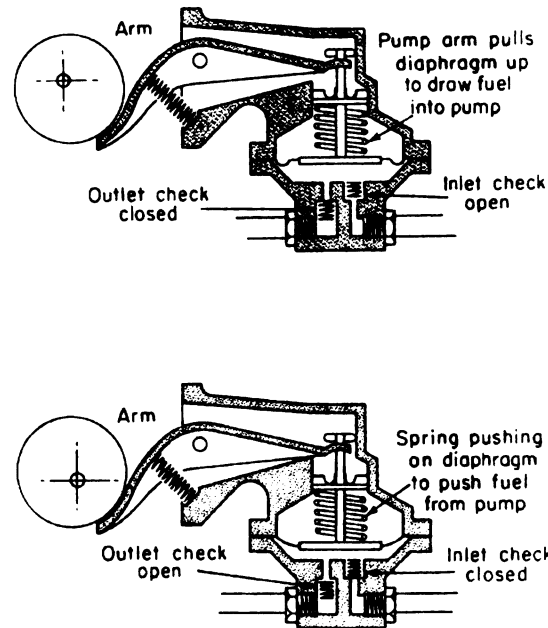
Section view of a mechanical diaphragm pump on the inlet and outlet strokes (after Ellinger, H. E., 1976)
